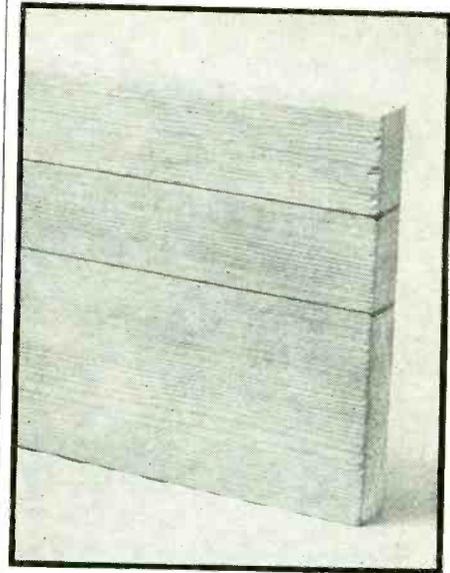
Edge-glued joints in $\frac{3}{4}$ -in. thick board made by the method shown in Fig. 10
